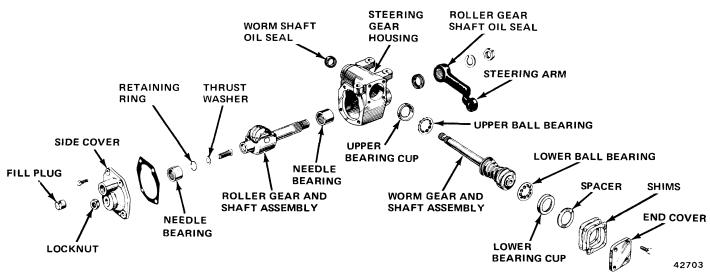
Steering Gear—Right-Hand Drive Vehicles
